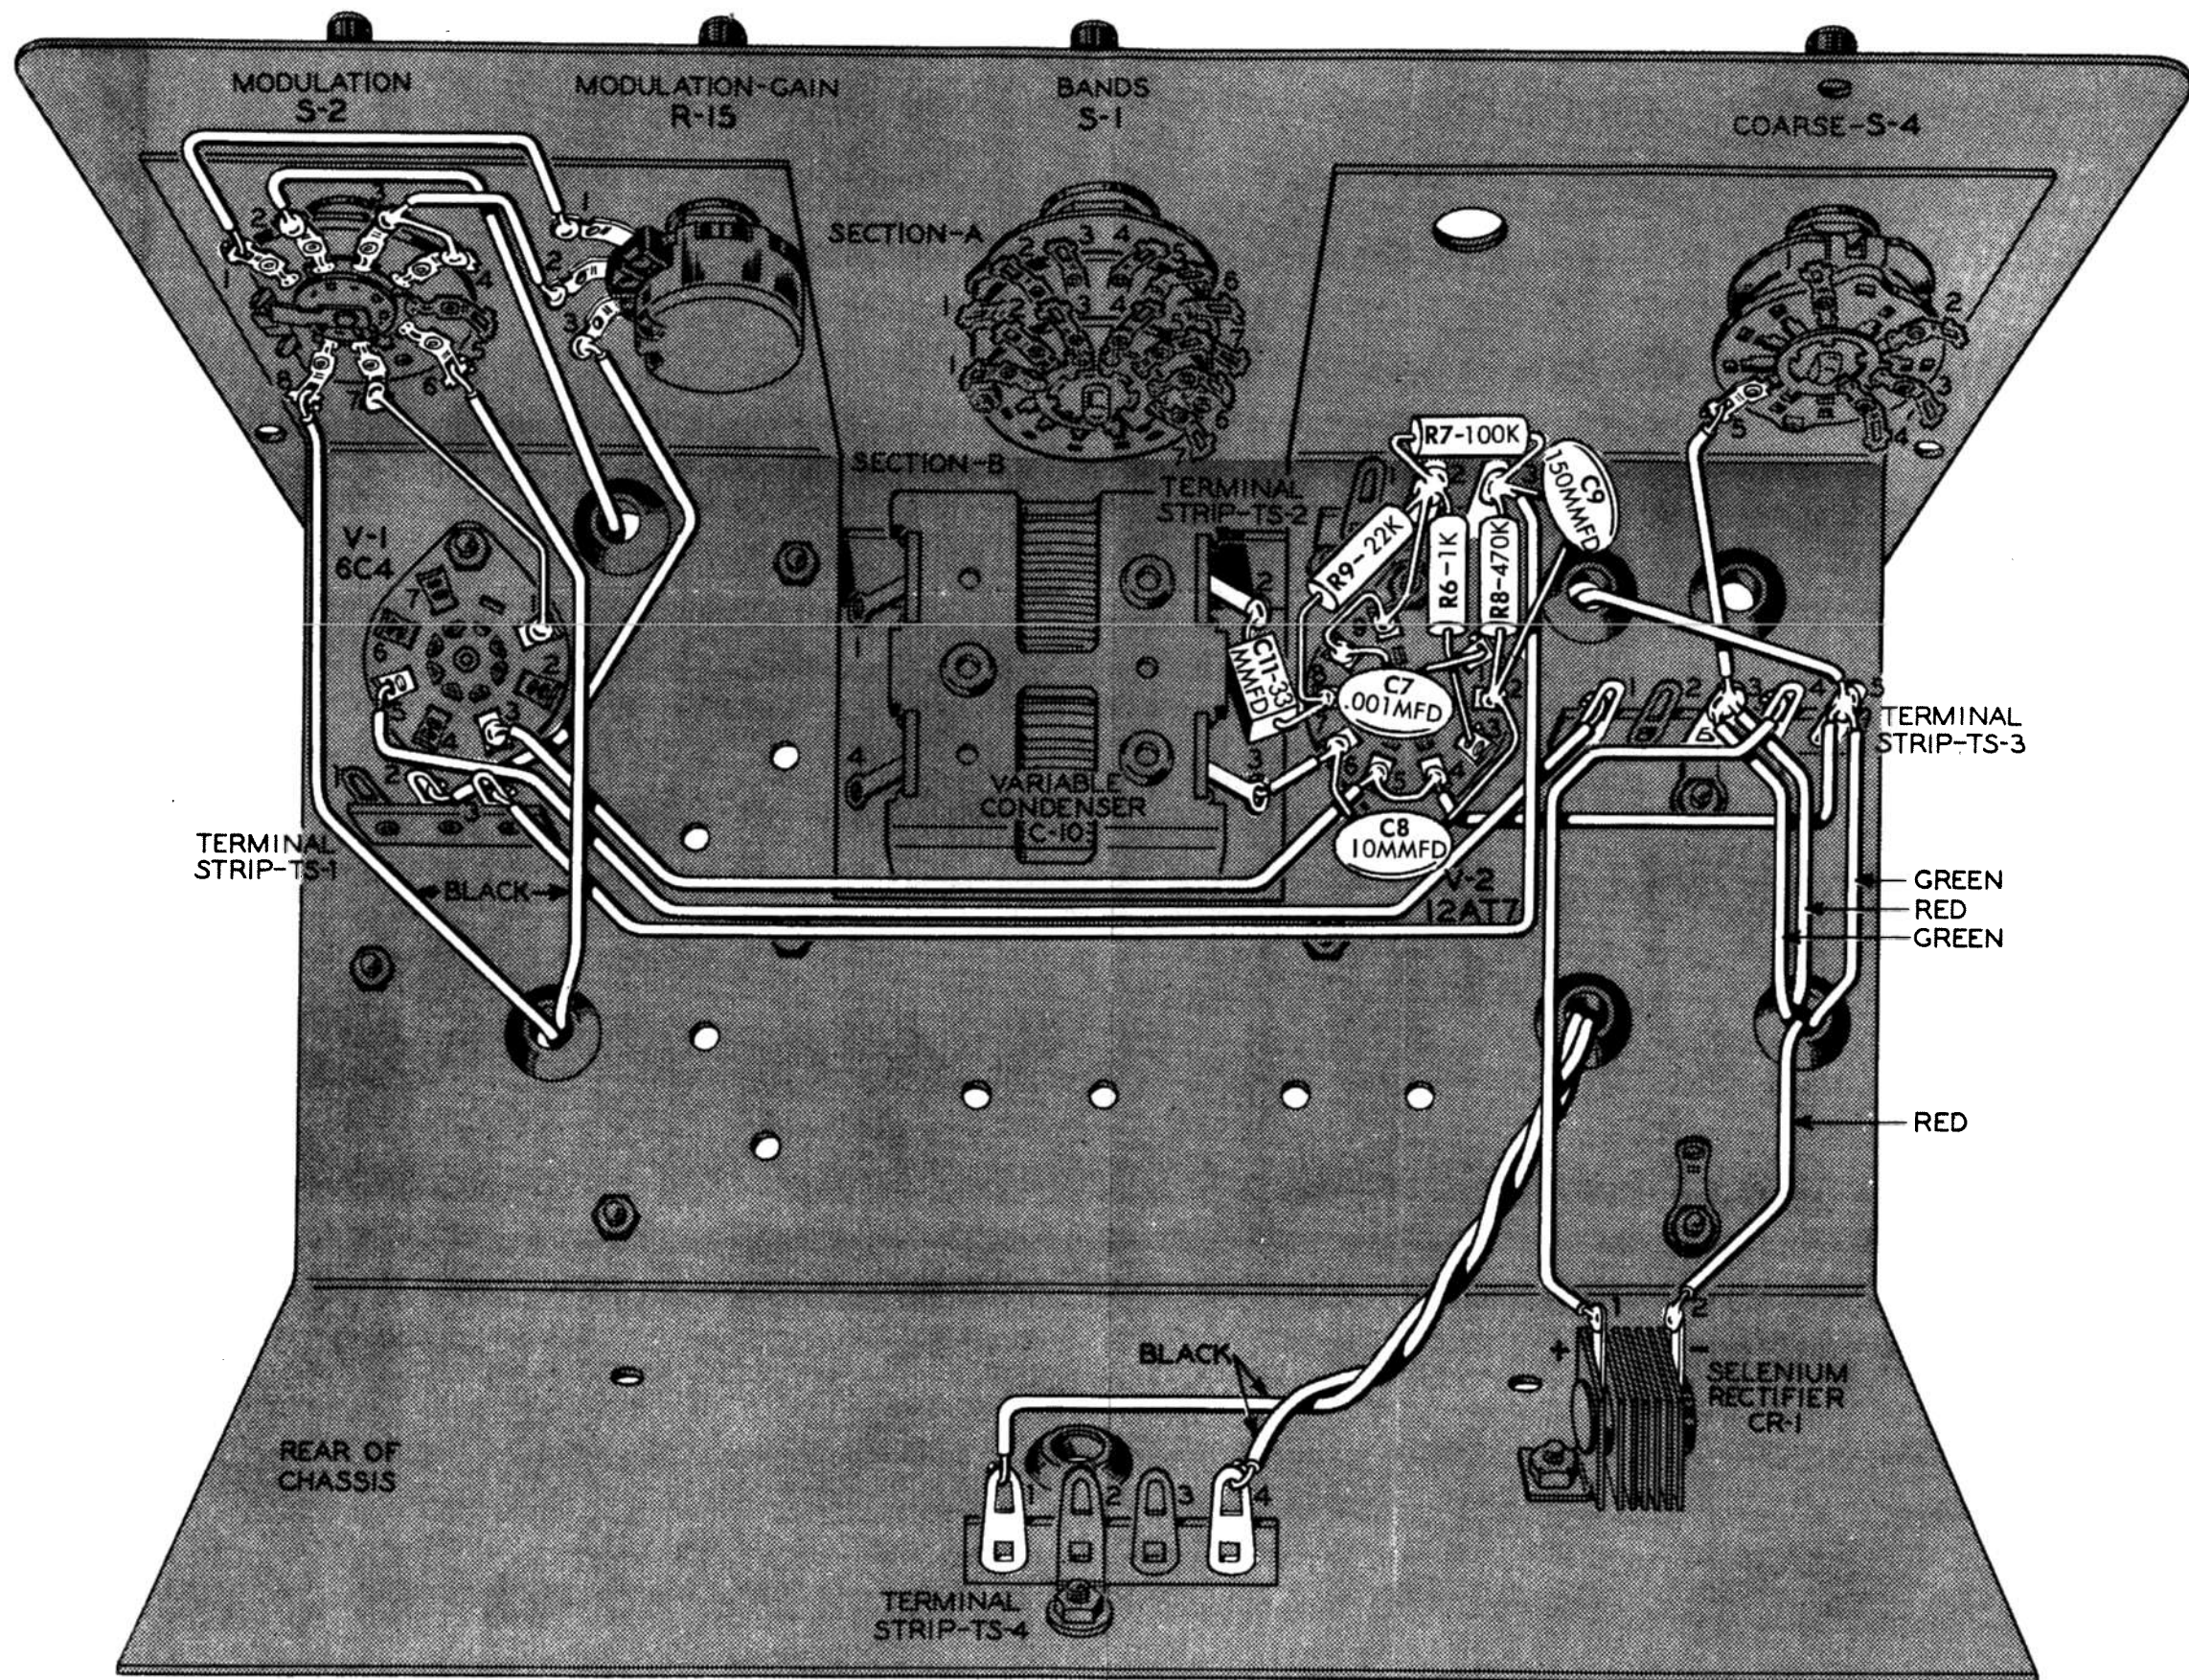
FIRST WIRING VIEW INSIDE THE CHASSIS.
